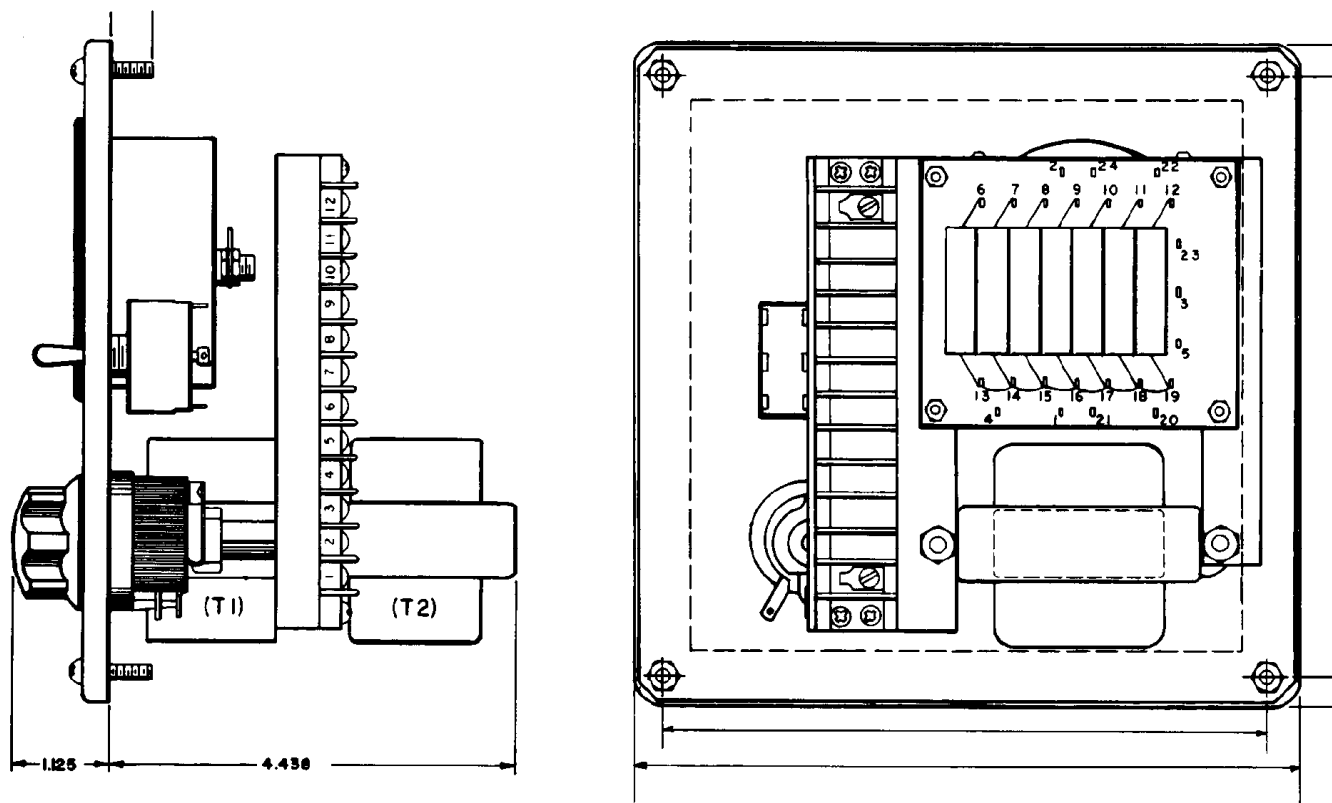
Outline Drawing of the EG Series Power Transfer Control
